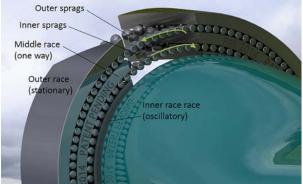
A patented design for wind turbine that prevents false brinelling (Source – Plymouth Machine Integration).
